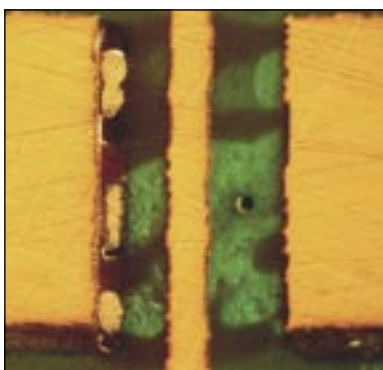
Solder shorting and voiding under a chip component when viewed from under the pads
